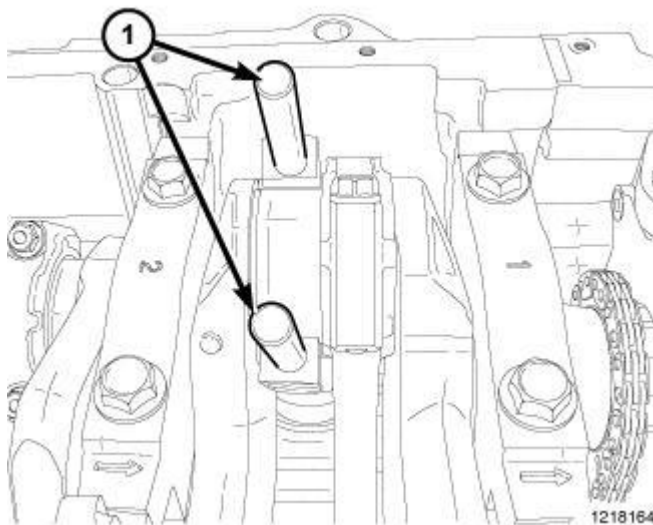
Identifying Mark On Connecting Rod And Bearing Cap
